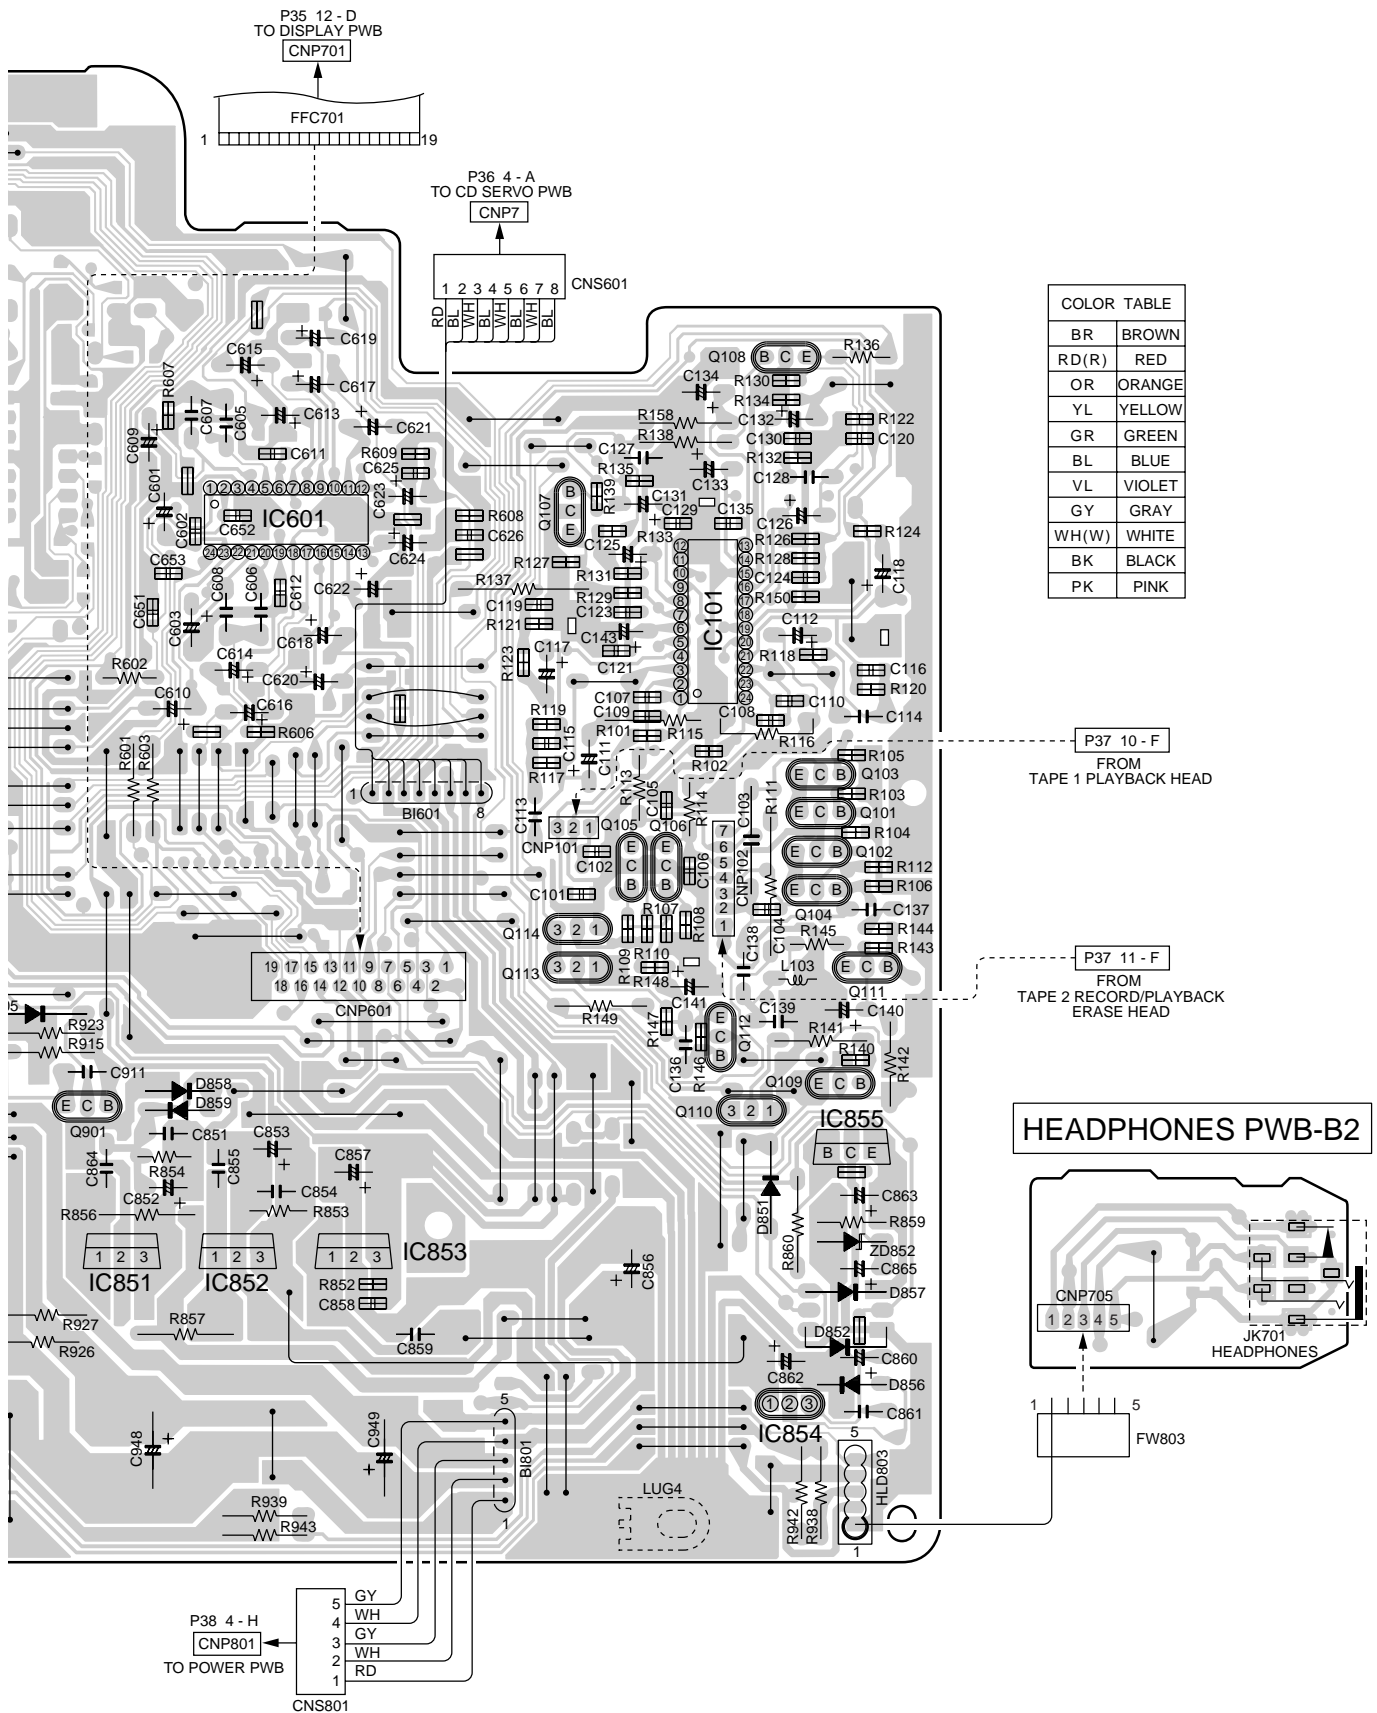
WIRING SIDE OF P.W.BOARD (2/7)
